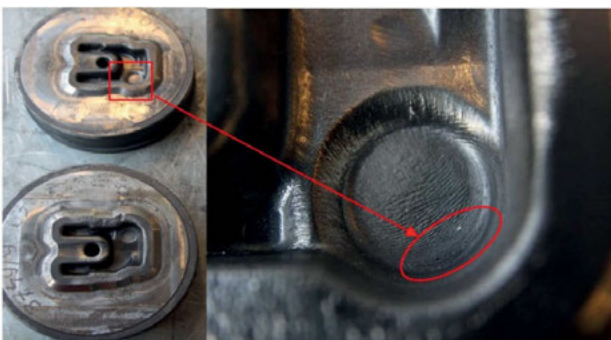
Fracture in the corner of the die inserts and zoomed fractured area
